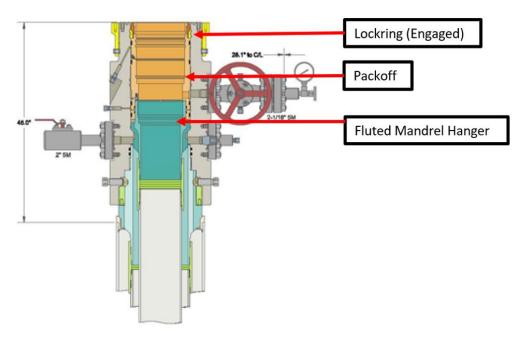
Cactus Offline Cementing Tool Schematic (5M tool)
